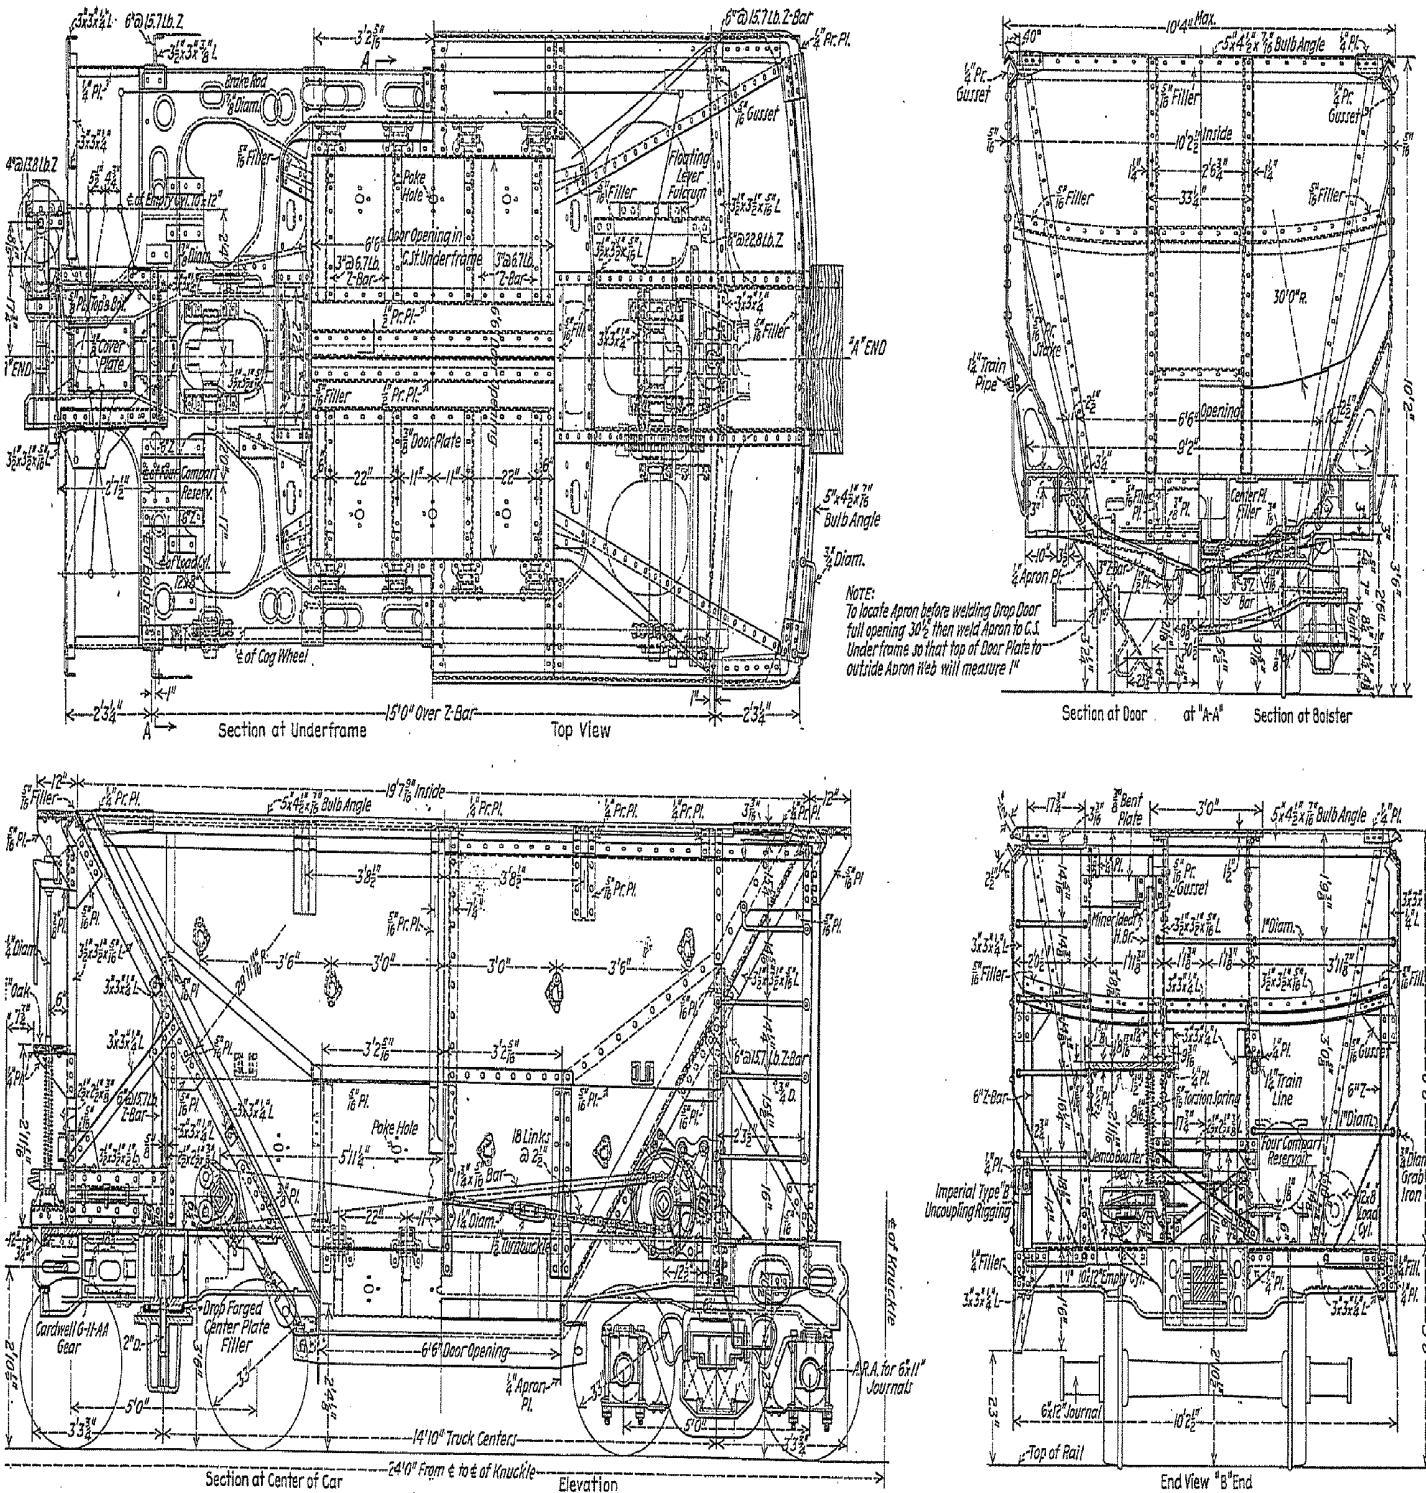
Plan, Elevation and Sections of Duluth, Missabe & Northern 96-Ton Capacity Hopper Ore Car with Commonwealth Cast Steel Underframe.
